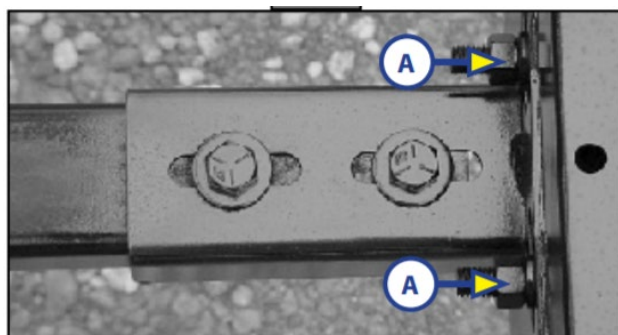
Room Bar mounting bracket - idler side. The drive side will not have adjustments on the guide rail.
